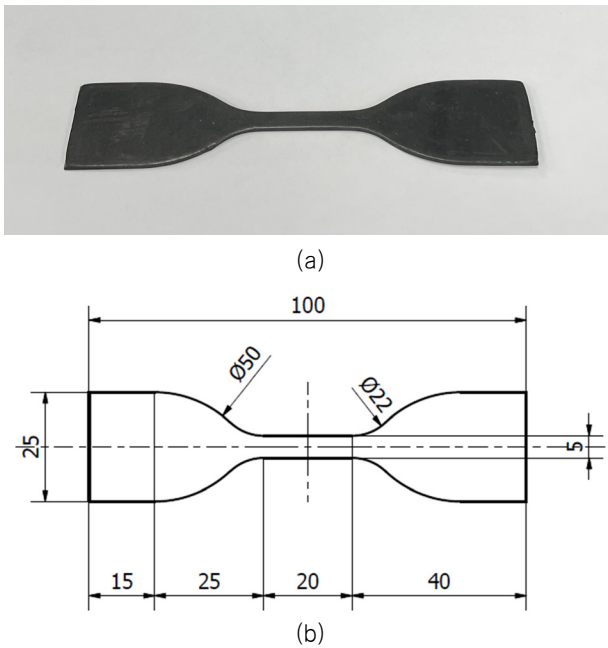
(a) Specimen for uniaxial tensile testing and (b) dimension of chloroprene specimen
